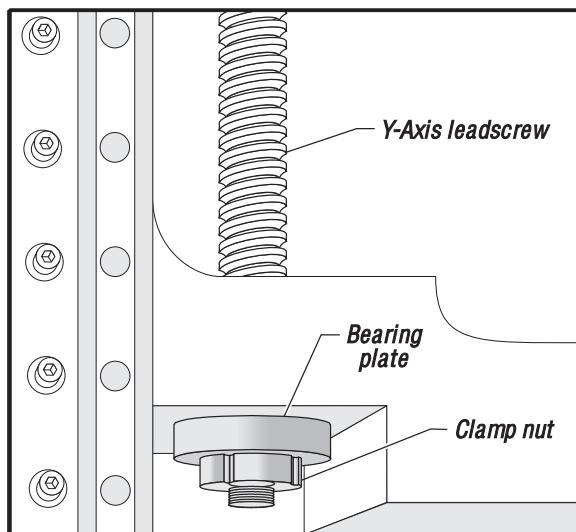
Y-axis lead screw bearing support end clamp nut.
